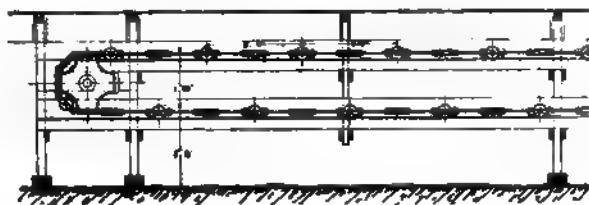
Latest Type of Bolinder Timber Conveyor as used in Timber Yards.
